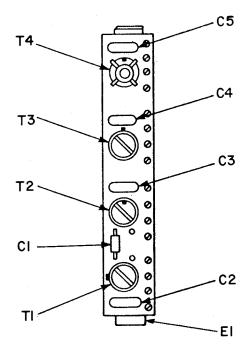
13 MHz Subassembly A2A4A3, Component Locations
